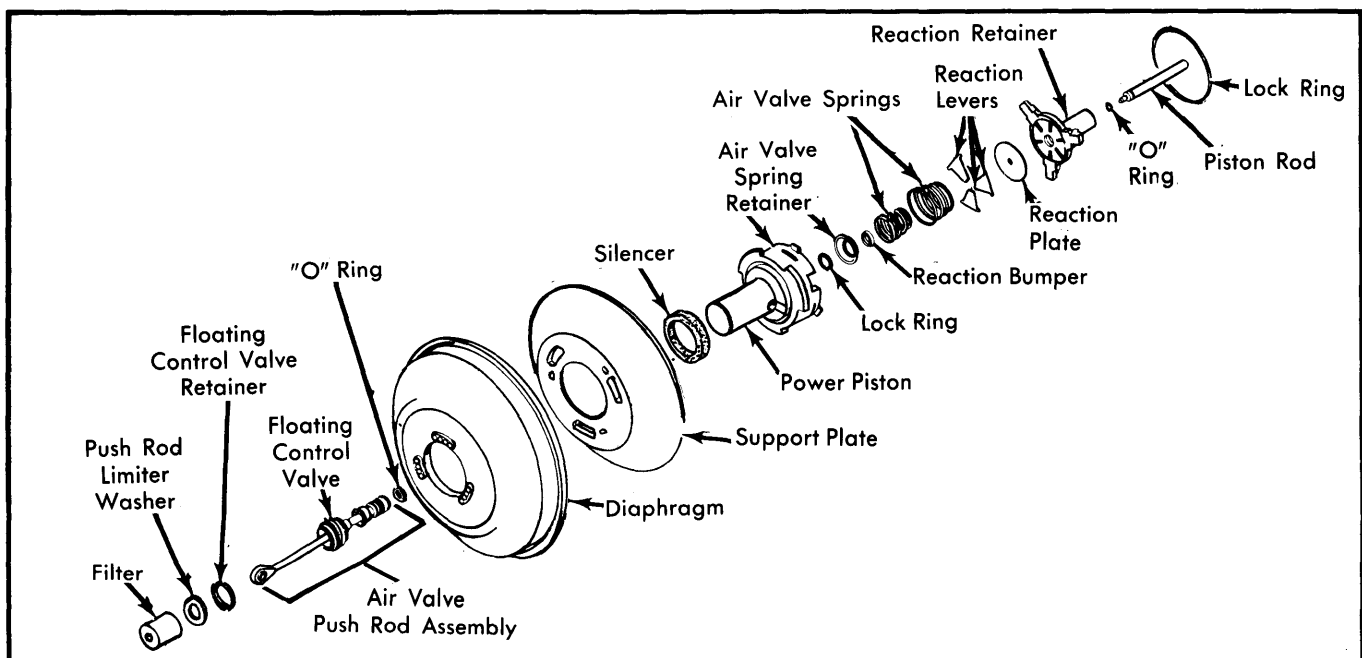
Exploded View of a Typical Delco-Moraine Single Diaphragm Power Piston Assembly
